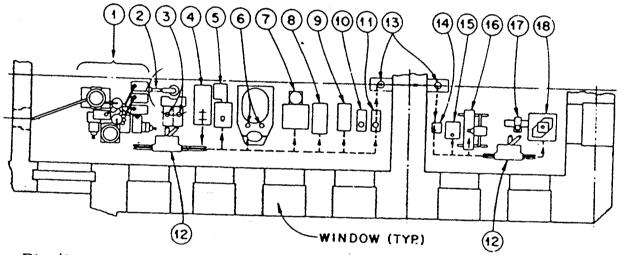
Layout of equipment for the TURF oxide fabrication line. 1, Powder-preparation equipment. 2, Fuel transfer machine. 3, Vibratory compactor. 4, Tube magazine. 5, Check weigher. 6, Gamma scanner. 7, Capping machine. 8, Welding machine. 9, Leak-check machine. 10, Reject rack. 11, Cleaning and transfer basket. 12, Fuel-rod transfer machine. 13, Cleaner transfer machine. 14, Fuel-rod basket. 15, Contamination monitor. 16, Weld radiography machine. 17, Fuel-rod dimensional check. 18, Fuel-element assembly and inspection machine. (93)
